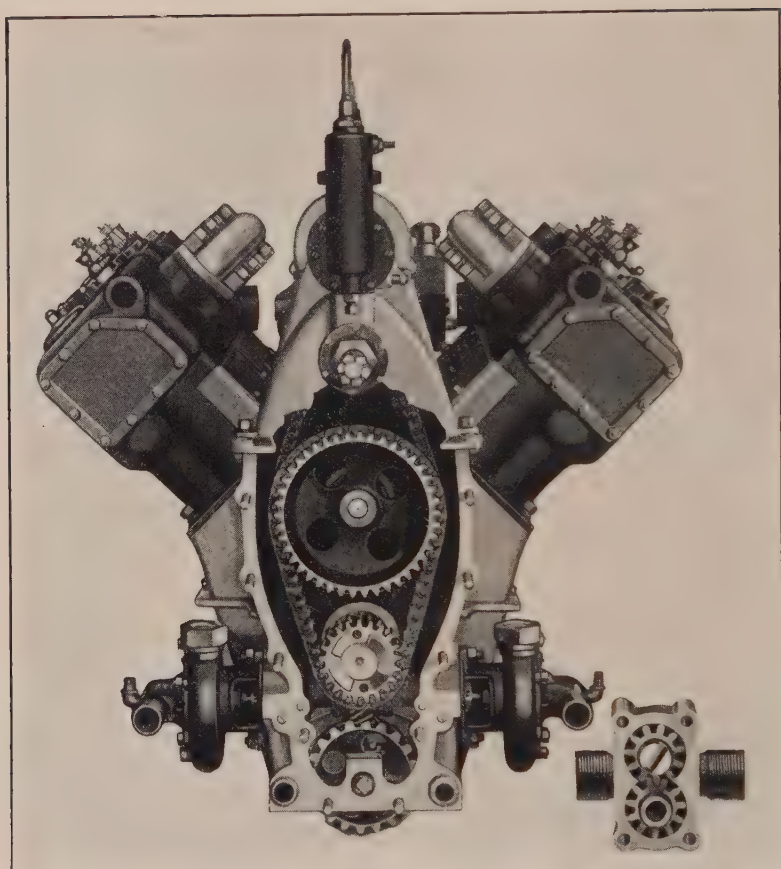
Cadillac eight-cylinder V-type engine. (Front view)
